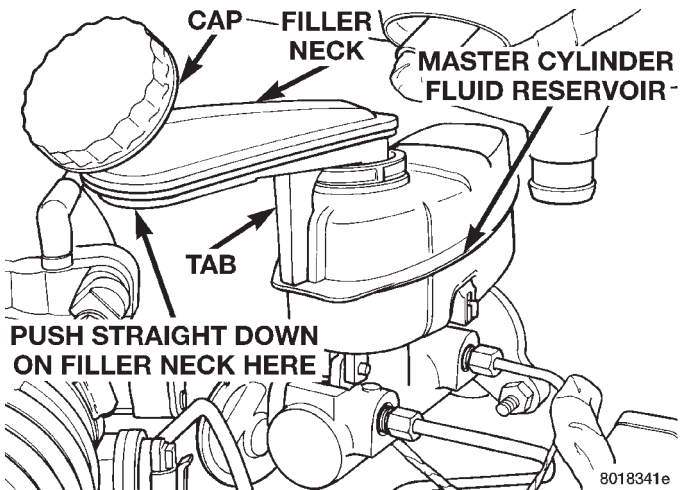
Master Cylinder Fluid Reservoir Filler Neck INSTALL
